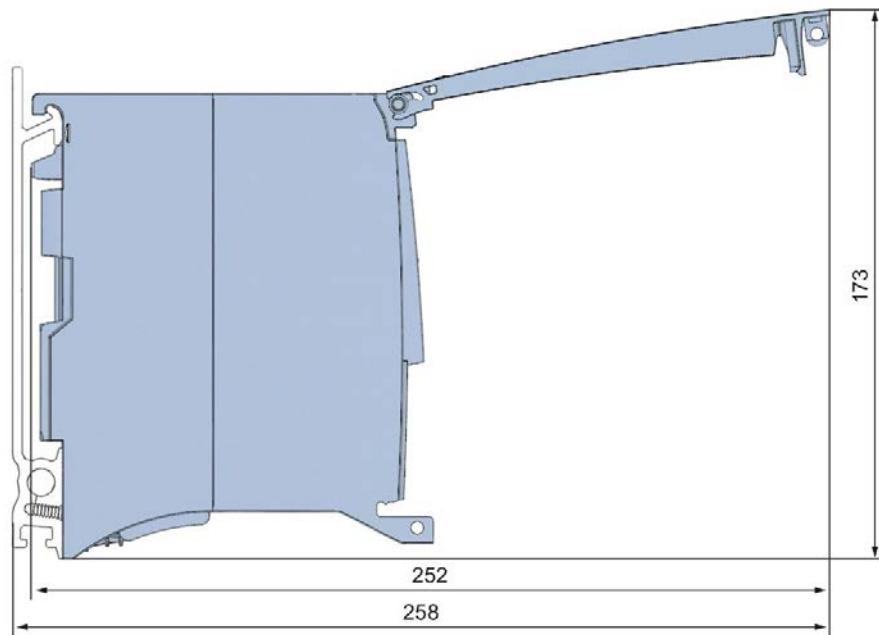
Dimension drawing of the IM 155-5 PN BA interface module, side view with open front cover
